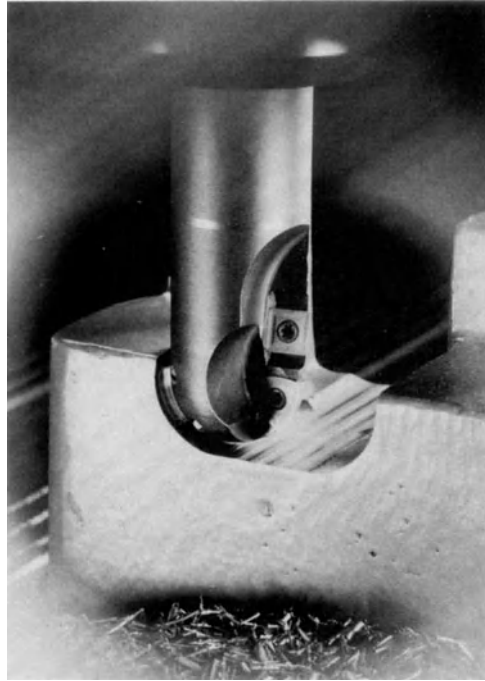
A ball-nosed cutter with inserts positioned such that a swept volume occurs upon rotation. A wide range of materials can be machined simply by changing the grade of insert, which is true to a certain extent for all inserted-toothed cutters. [Courtesy of Walter Cutters.]
